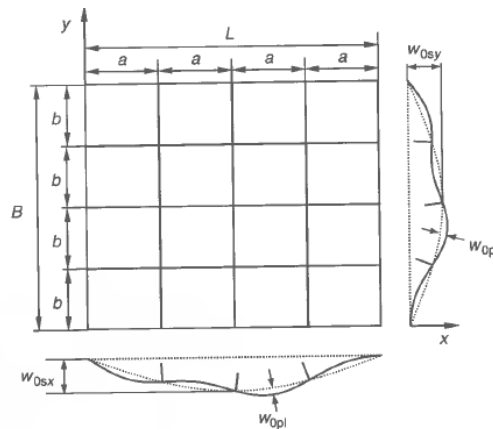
Initial deflection in stiffened panel due to welding [5]
